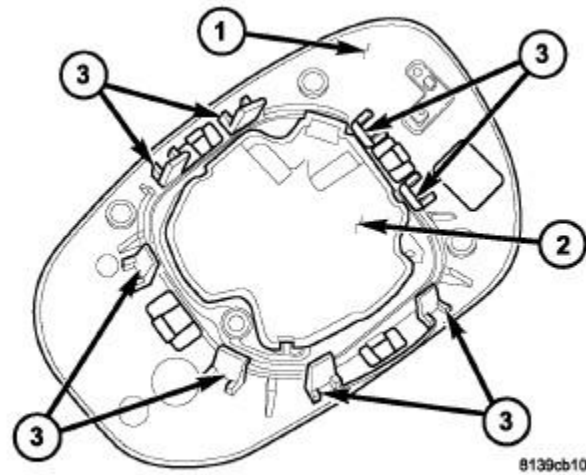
Mirror Glass Holder, Retaining Clips & Motor
